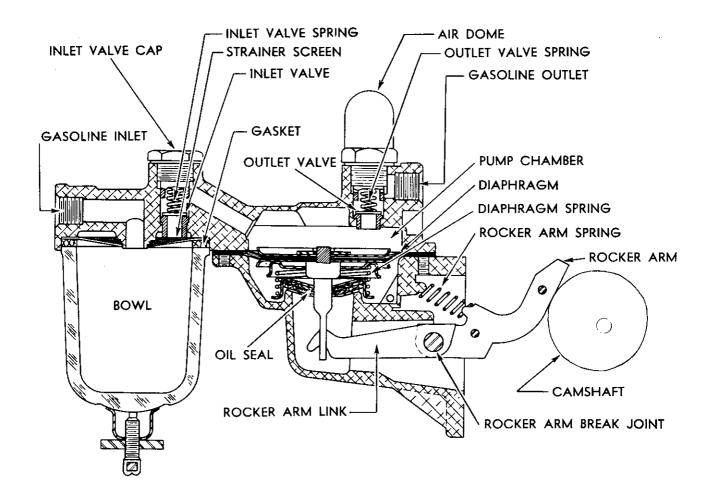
Construction of the Champion and Commander Fuel Pump
